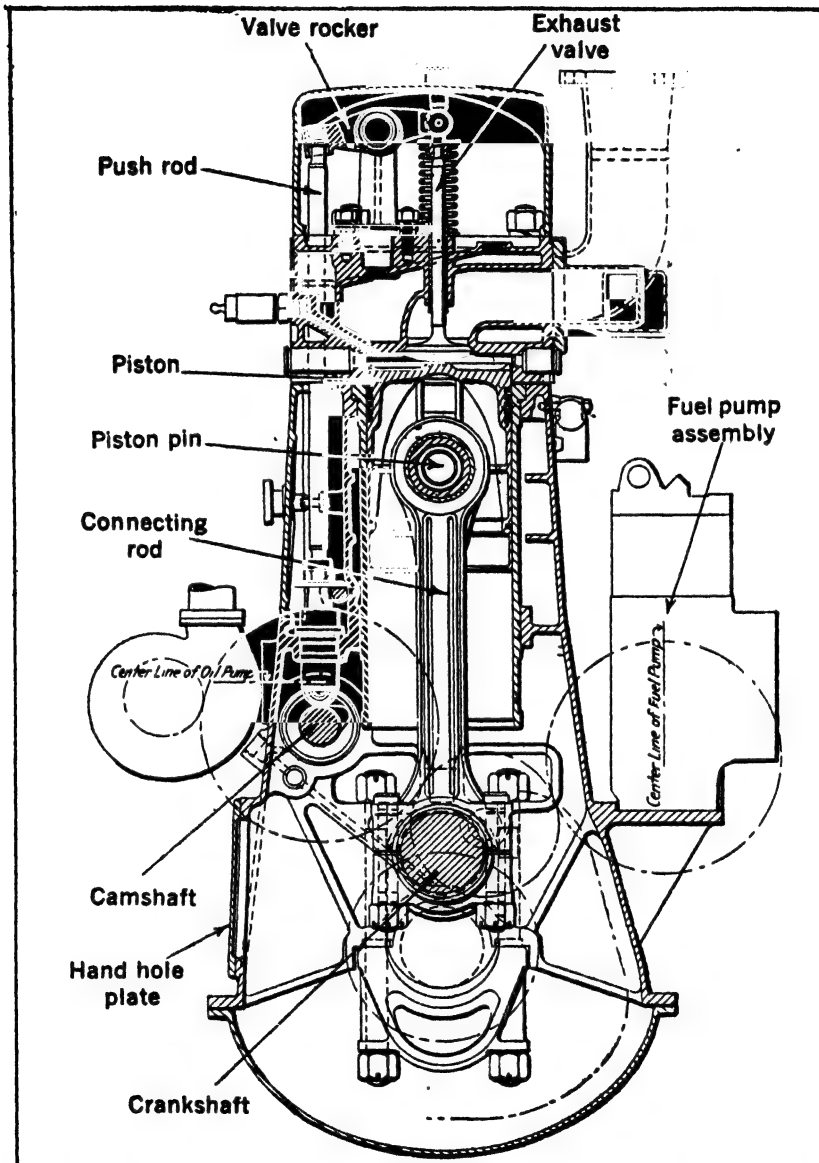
Part Sectional View of Automotive Type Diesel Engine Suitable for Motor Trucks and Tractors, but which is Too Heavy for Aircraft Use.
